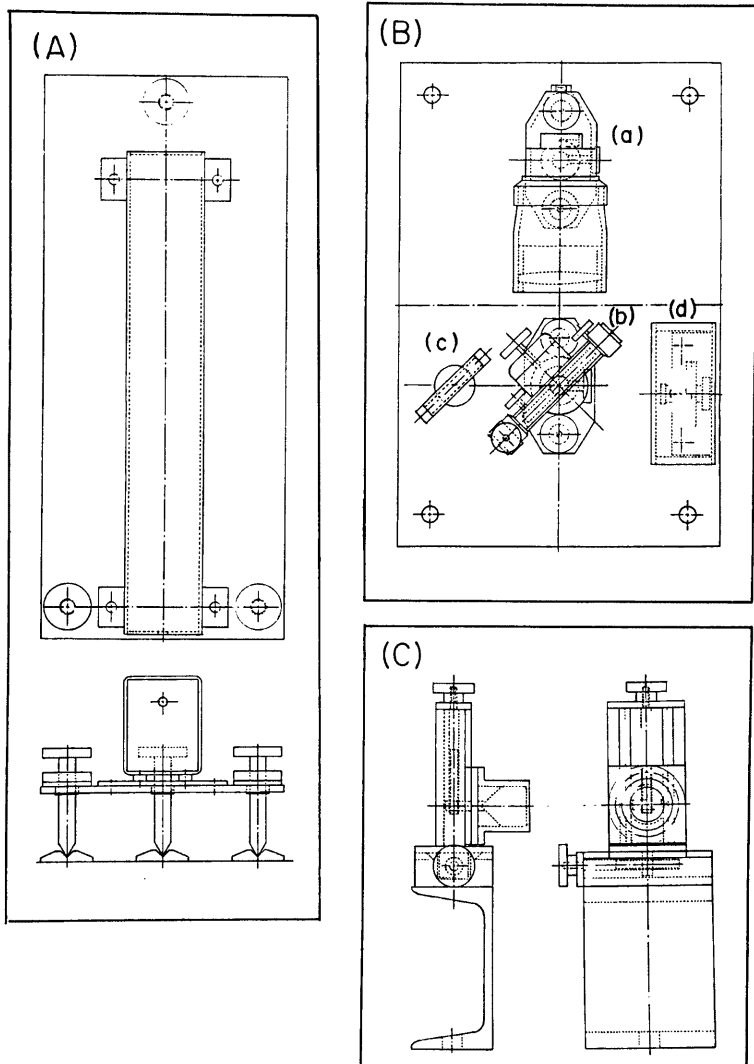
Mechanical design of optical mount. (A); laser source, (B); beam splitter ((a) beam expanding telescope, (b) half-mirror, (c) compensator, (d) image-sensor housing), (C); retroreflector.
